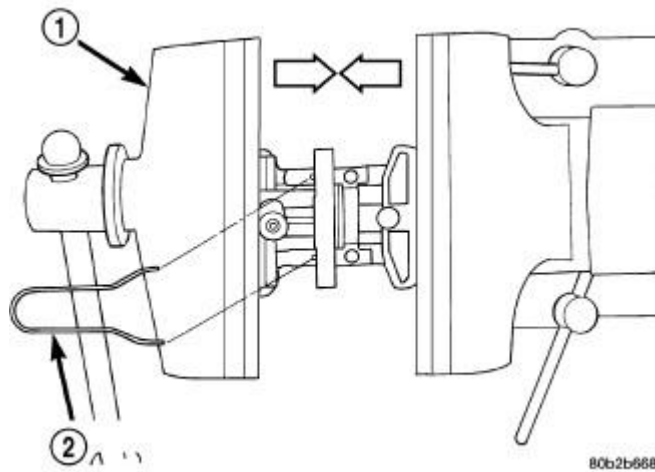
Locking Camshaft (Secondary) Chain Tensioner
